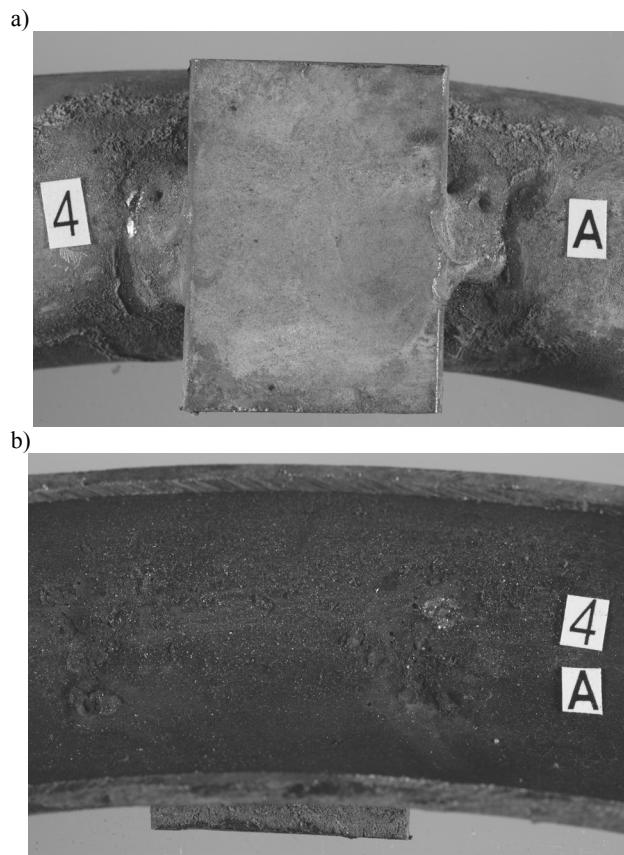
Stiffener welded to the pipe coil, a) outer surface, b) the inner surface attacked by pitting corrosion
